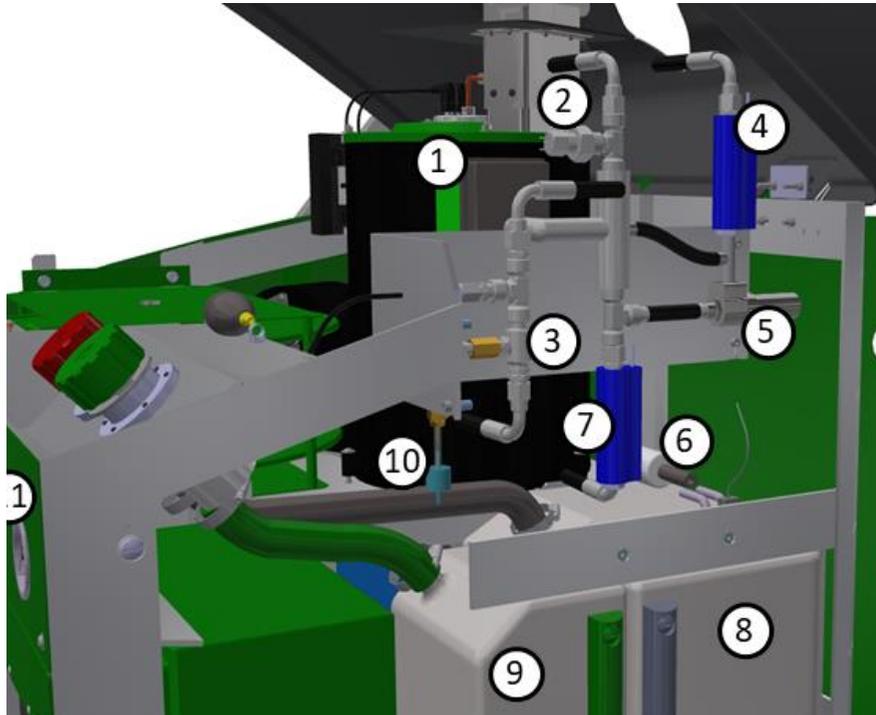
View of the M600 hydraulic panel (some parts hidden for clarity)
